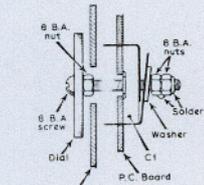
Assembly Details of Dial and Tuning Capacitor.
